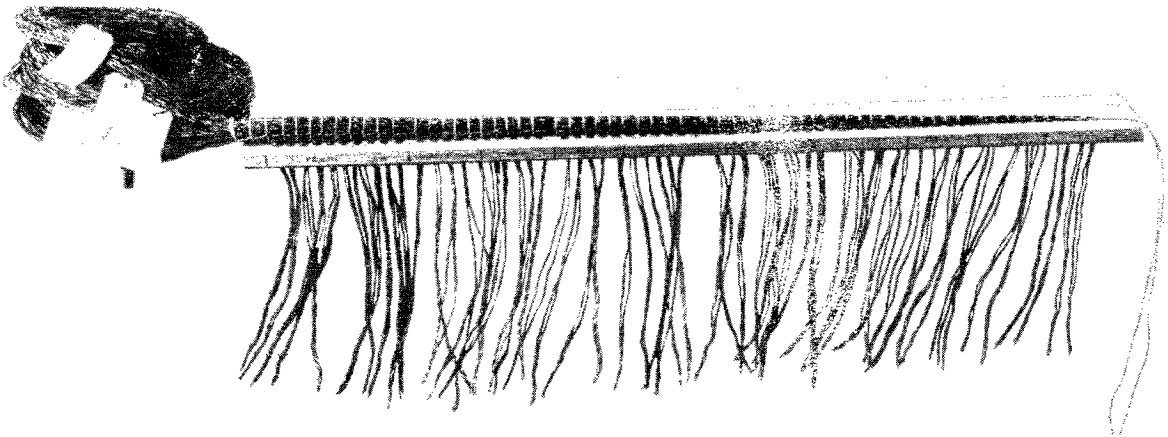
STRIPPED CABLE FORM - STAGE 3.
